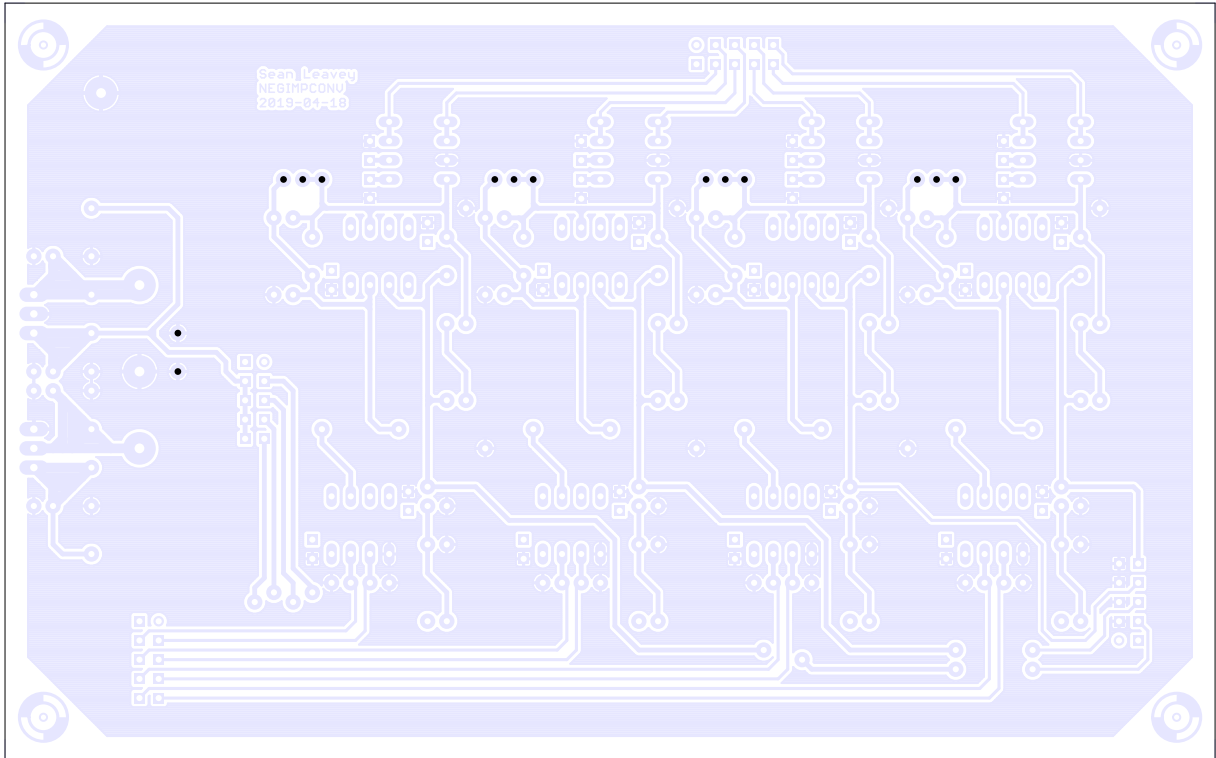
Board bottom view showing drills with 0.9 mm (0.035 in) diameter
